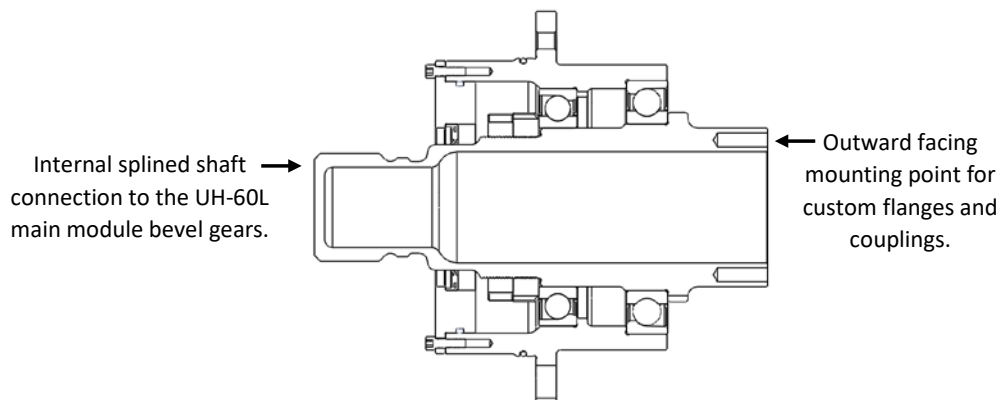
The input adapter is a bearing supported shaft with a splined interface to seal the UH-60L main module
